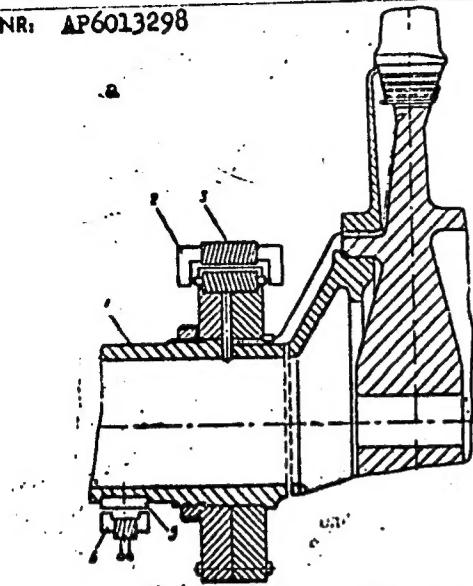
1 - machine shaft; 2 - magnetic connection; 3 - fixed electromagnets; 4 - magnetic screen; 5 - spline-like protrusion; 6 - auxiliary magnet
